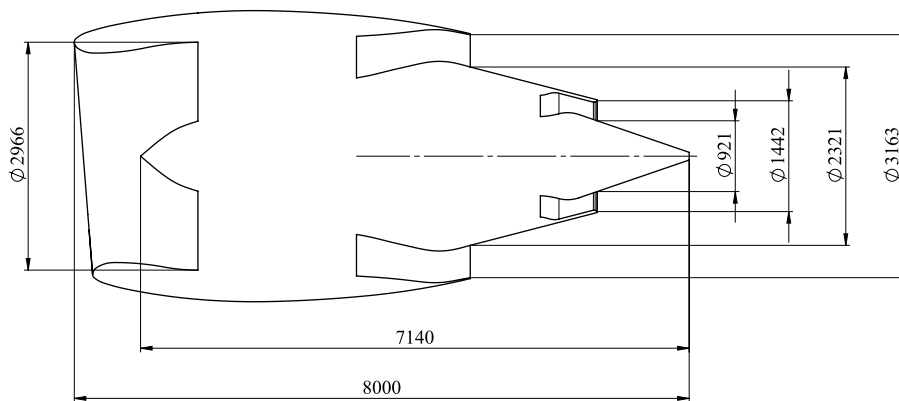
GE90-94B engine cross-section and dimensions (in mm)
